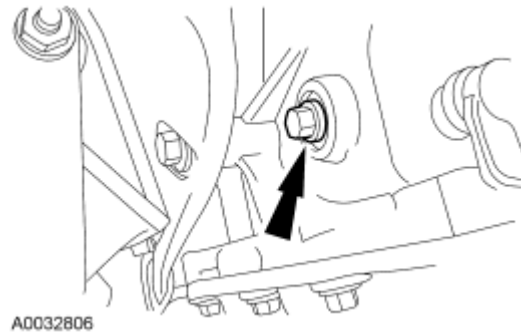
Installing Bolt Through Crankshaft Pulley And Thread It Into Front Cover
